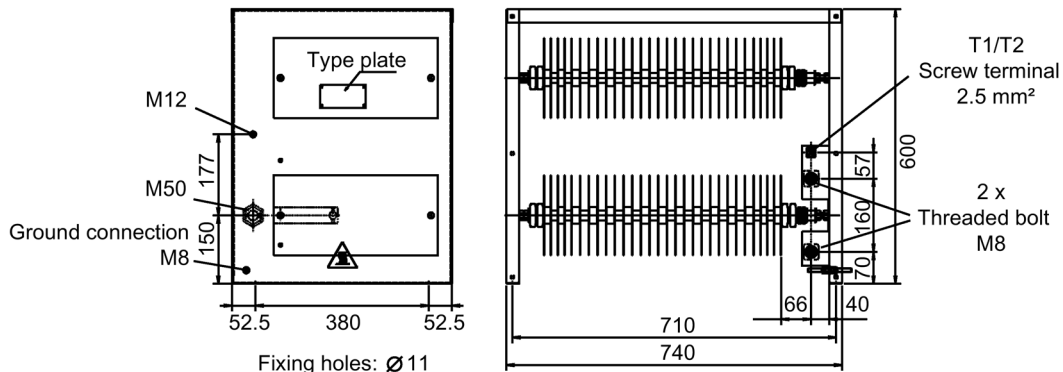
Dimension drawing for braking resistor (25 kW)
